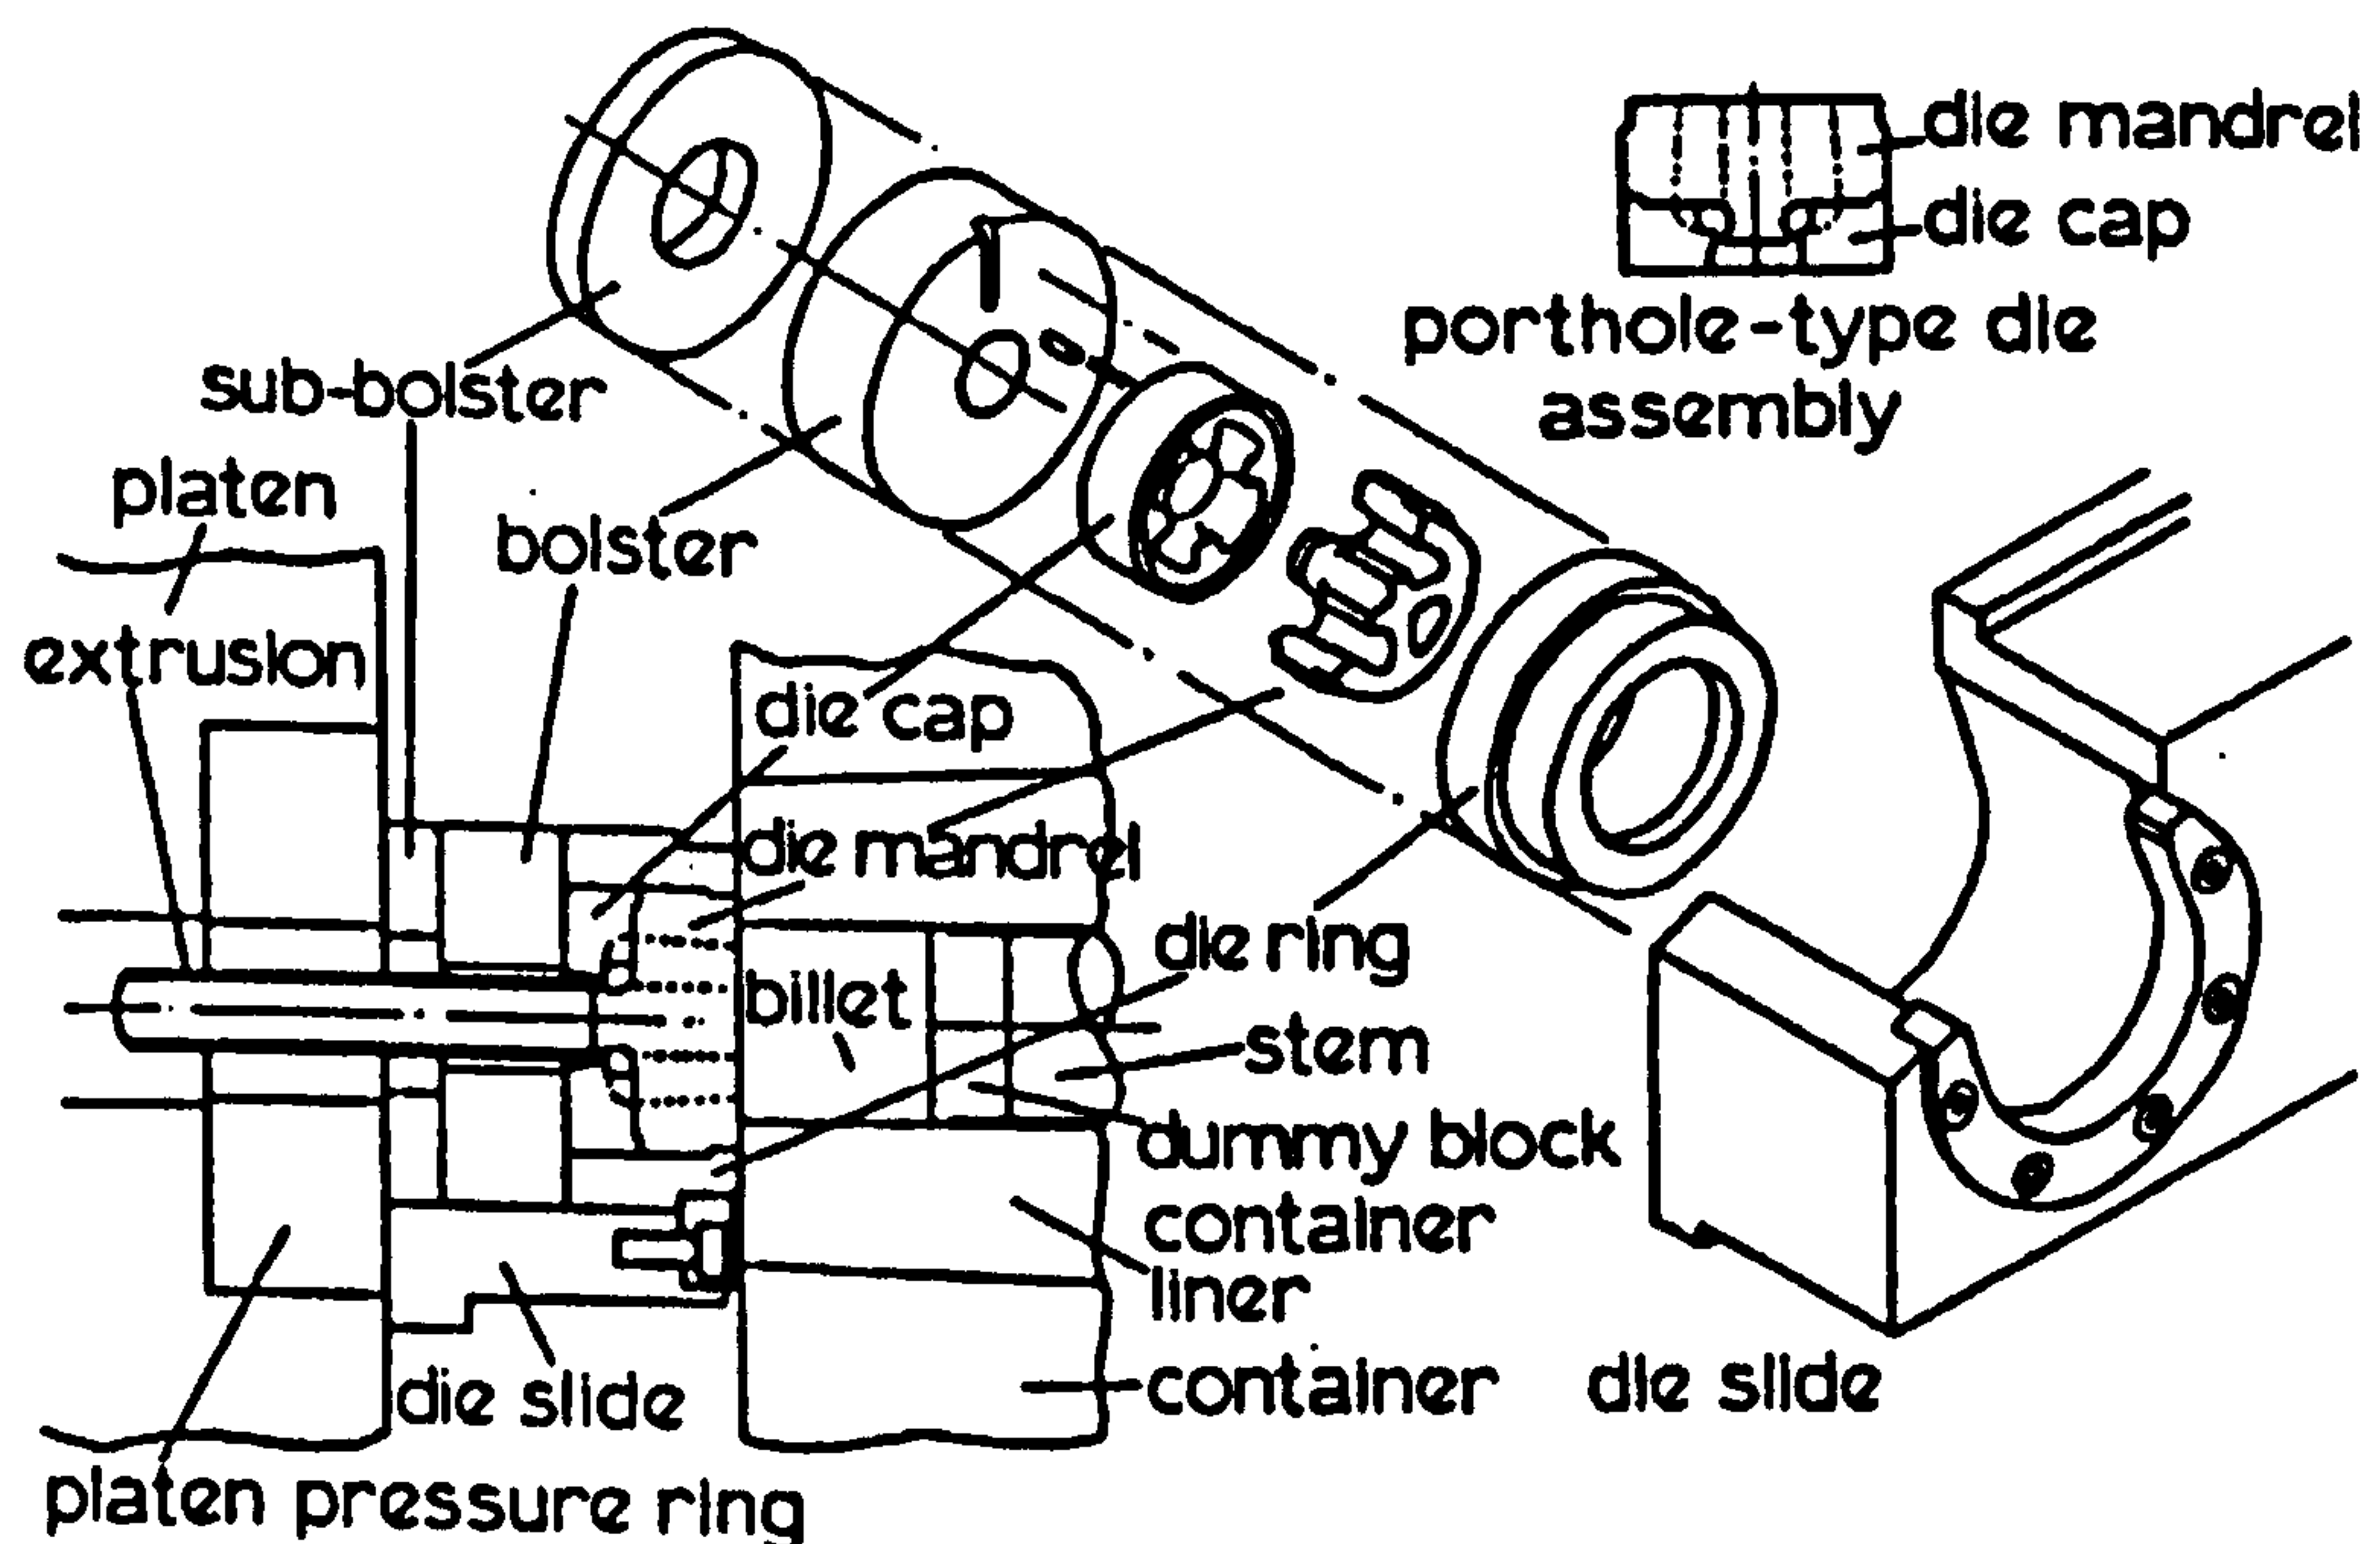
A typical porthole tooling arrangement for aluminium hollow sections (Courtesy of Sheppard ^[1])
